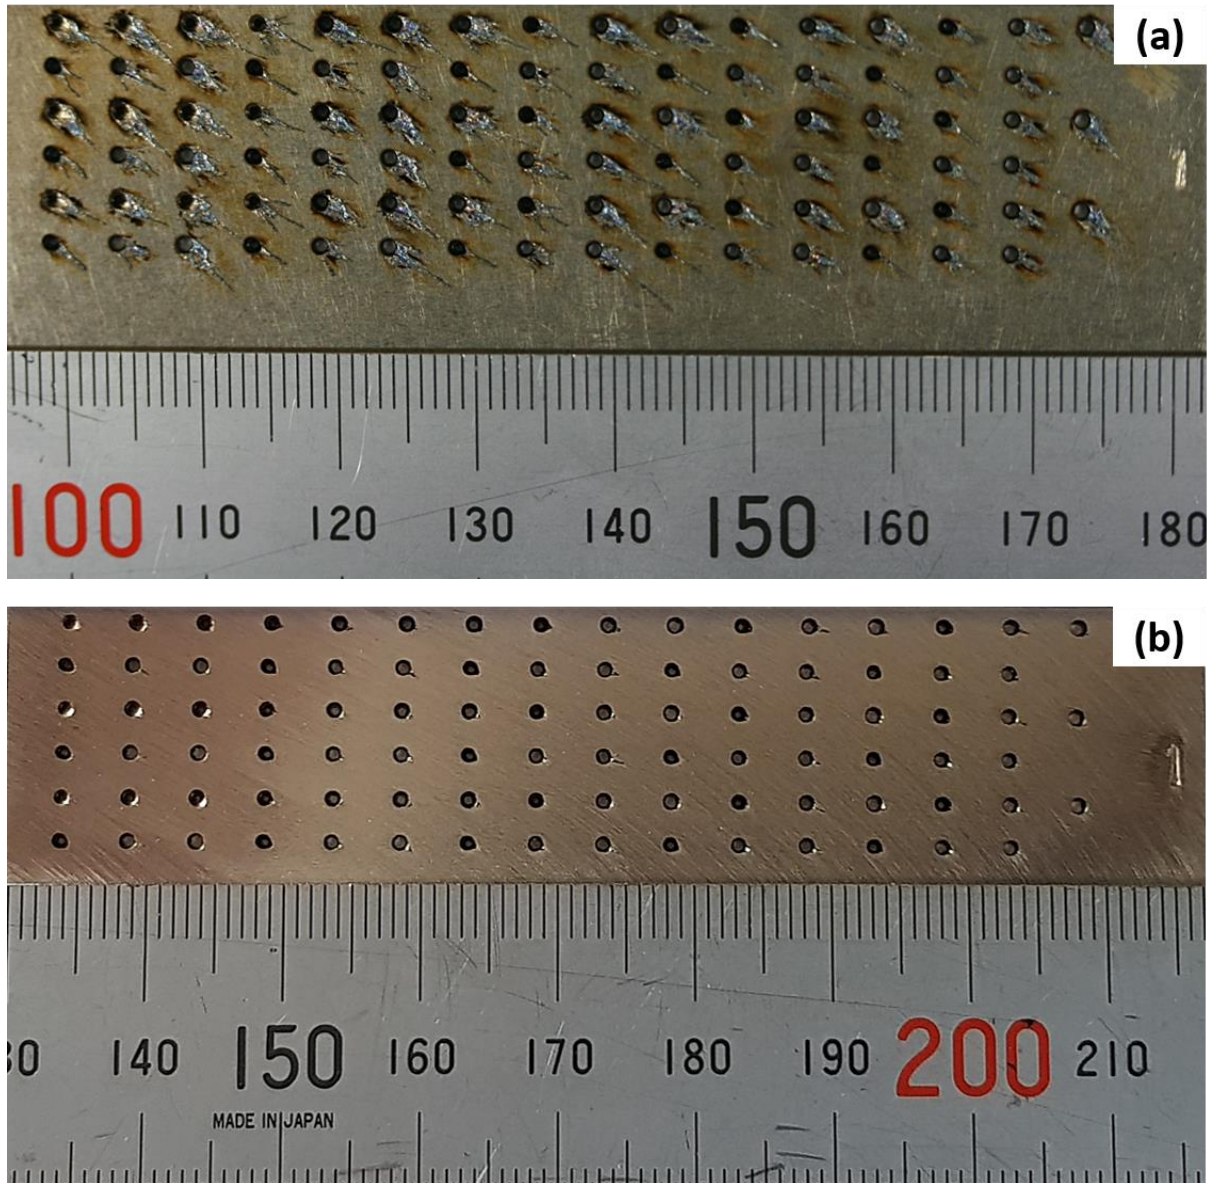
Laser drilling specimen (a) before cleaning (b) after cleaning
